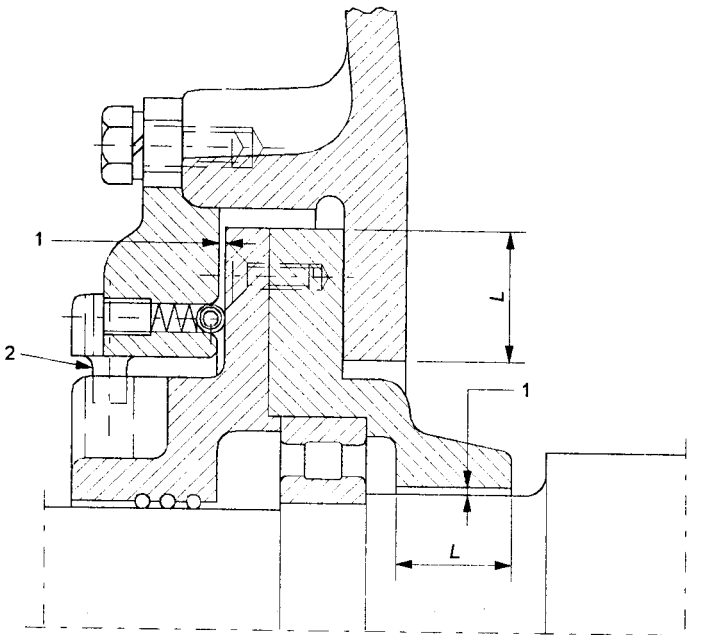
Example of labyrinth joint for shaft of rotating electrical machine
